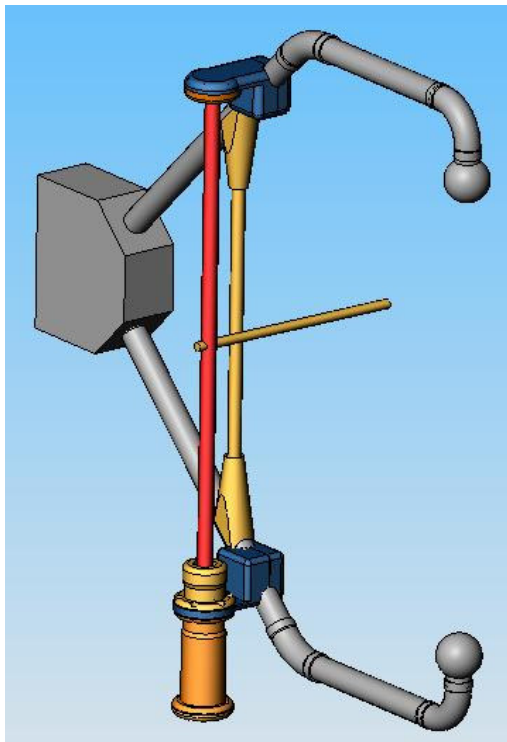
A schematic drawing of the motor drive system with the hot-film probe support pointed at 90° from the zero position (sonic claws and hot-film anemometer not pictured). Courtesy Jack Fox, NCAR EOL.
